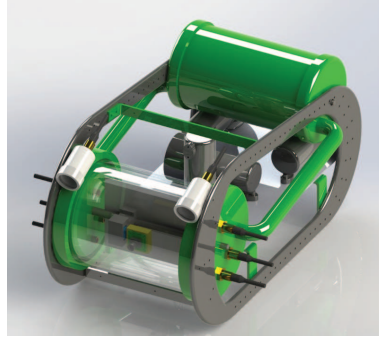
Technical drawing of DST-R-100-4 ROV
